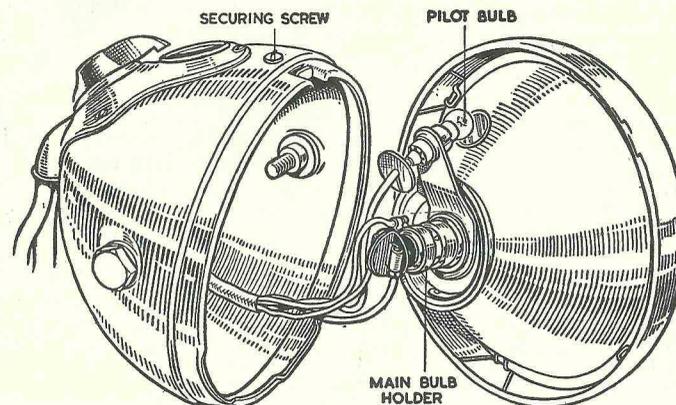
An early Model "SSU" Headlamp with Light Unit and Bayonet Cap Bulb.
